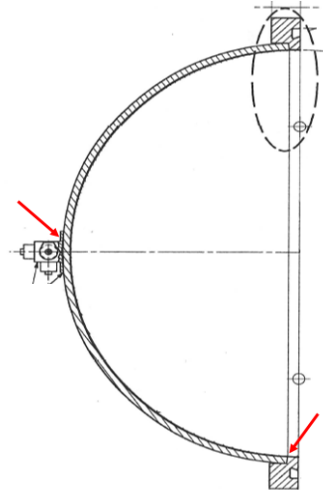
Schematic of hemisphere with flange and accelerometer block. Arrows indicate where welds need to be made.
